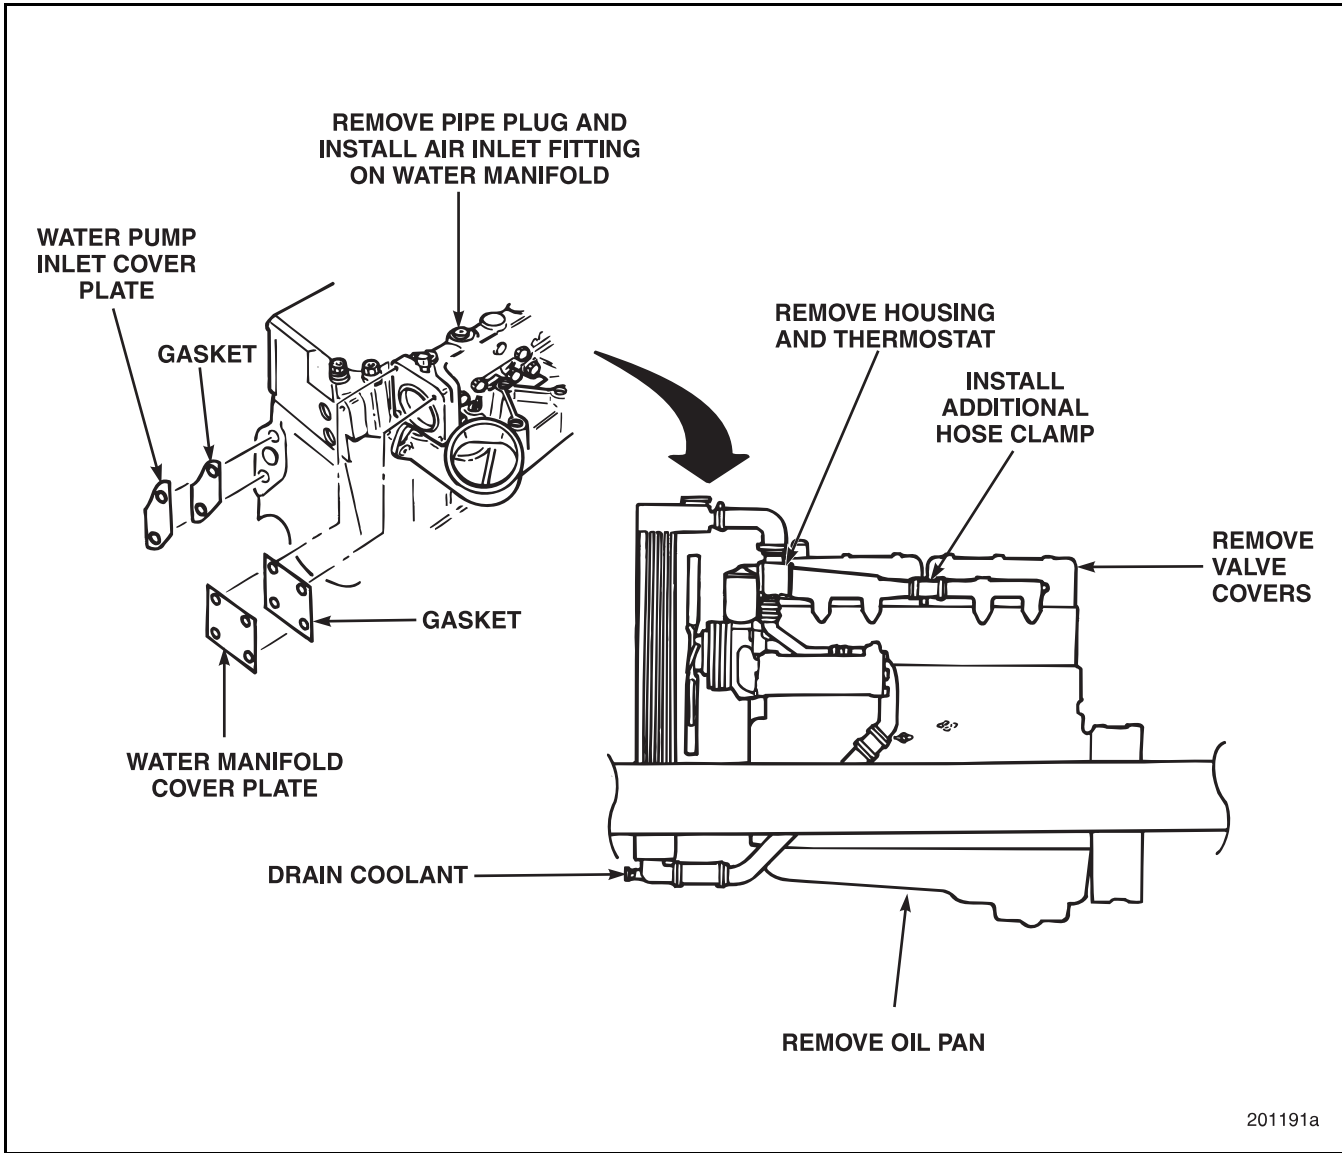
Cylinder Block/Cylinder Head Leak Check (In Chassis)
